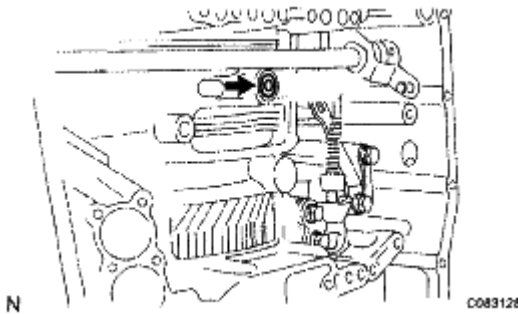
Locating Transaxle Case 2nd Brake Gasket
